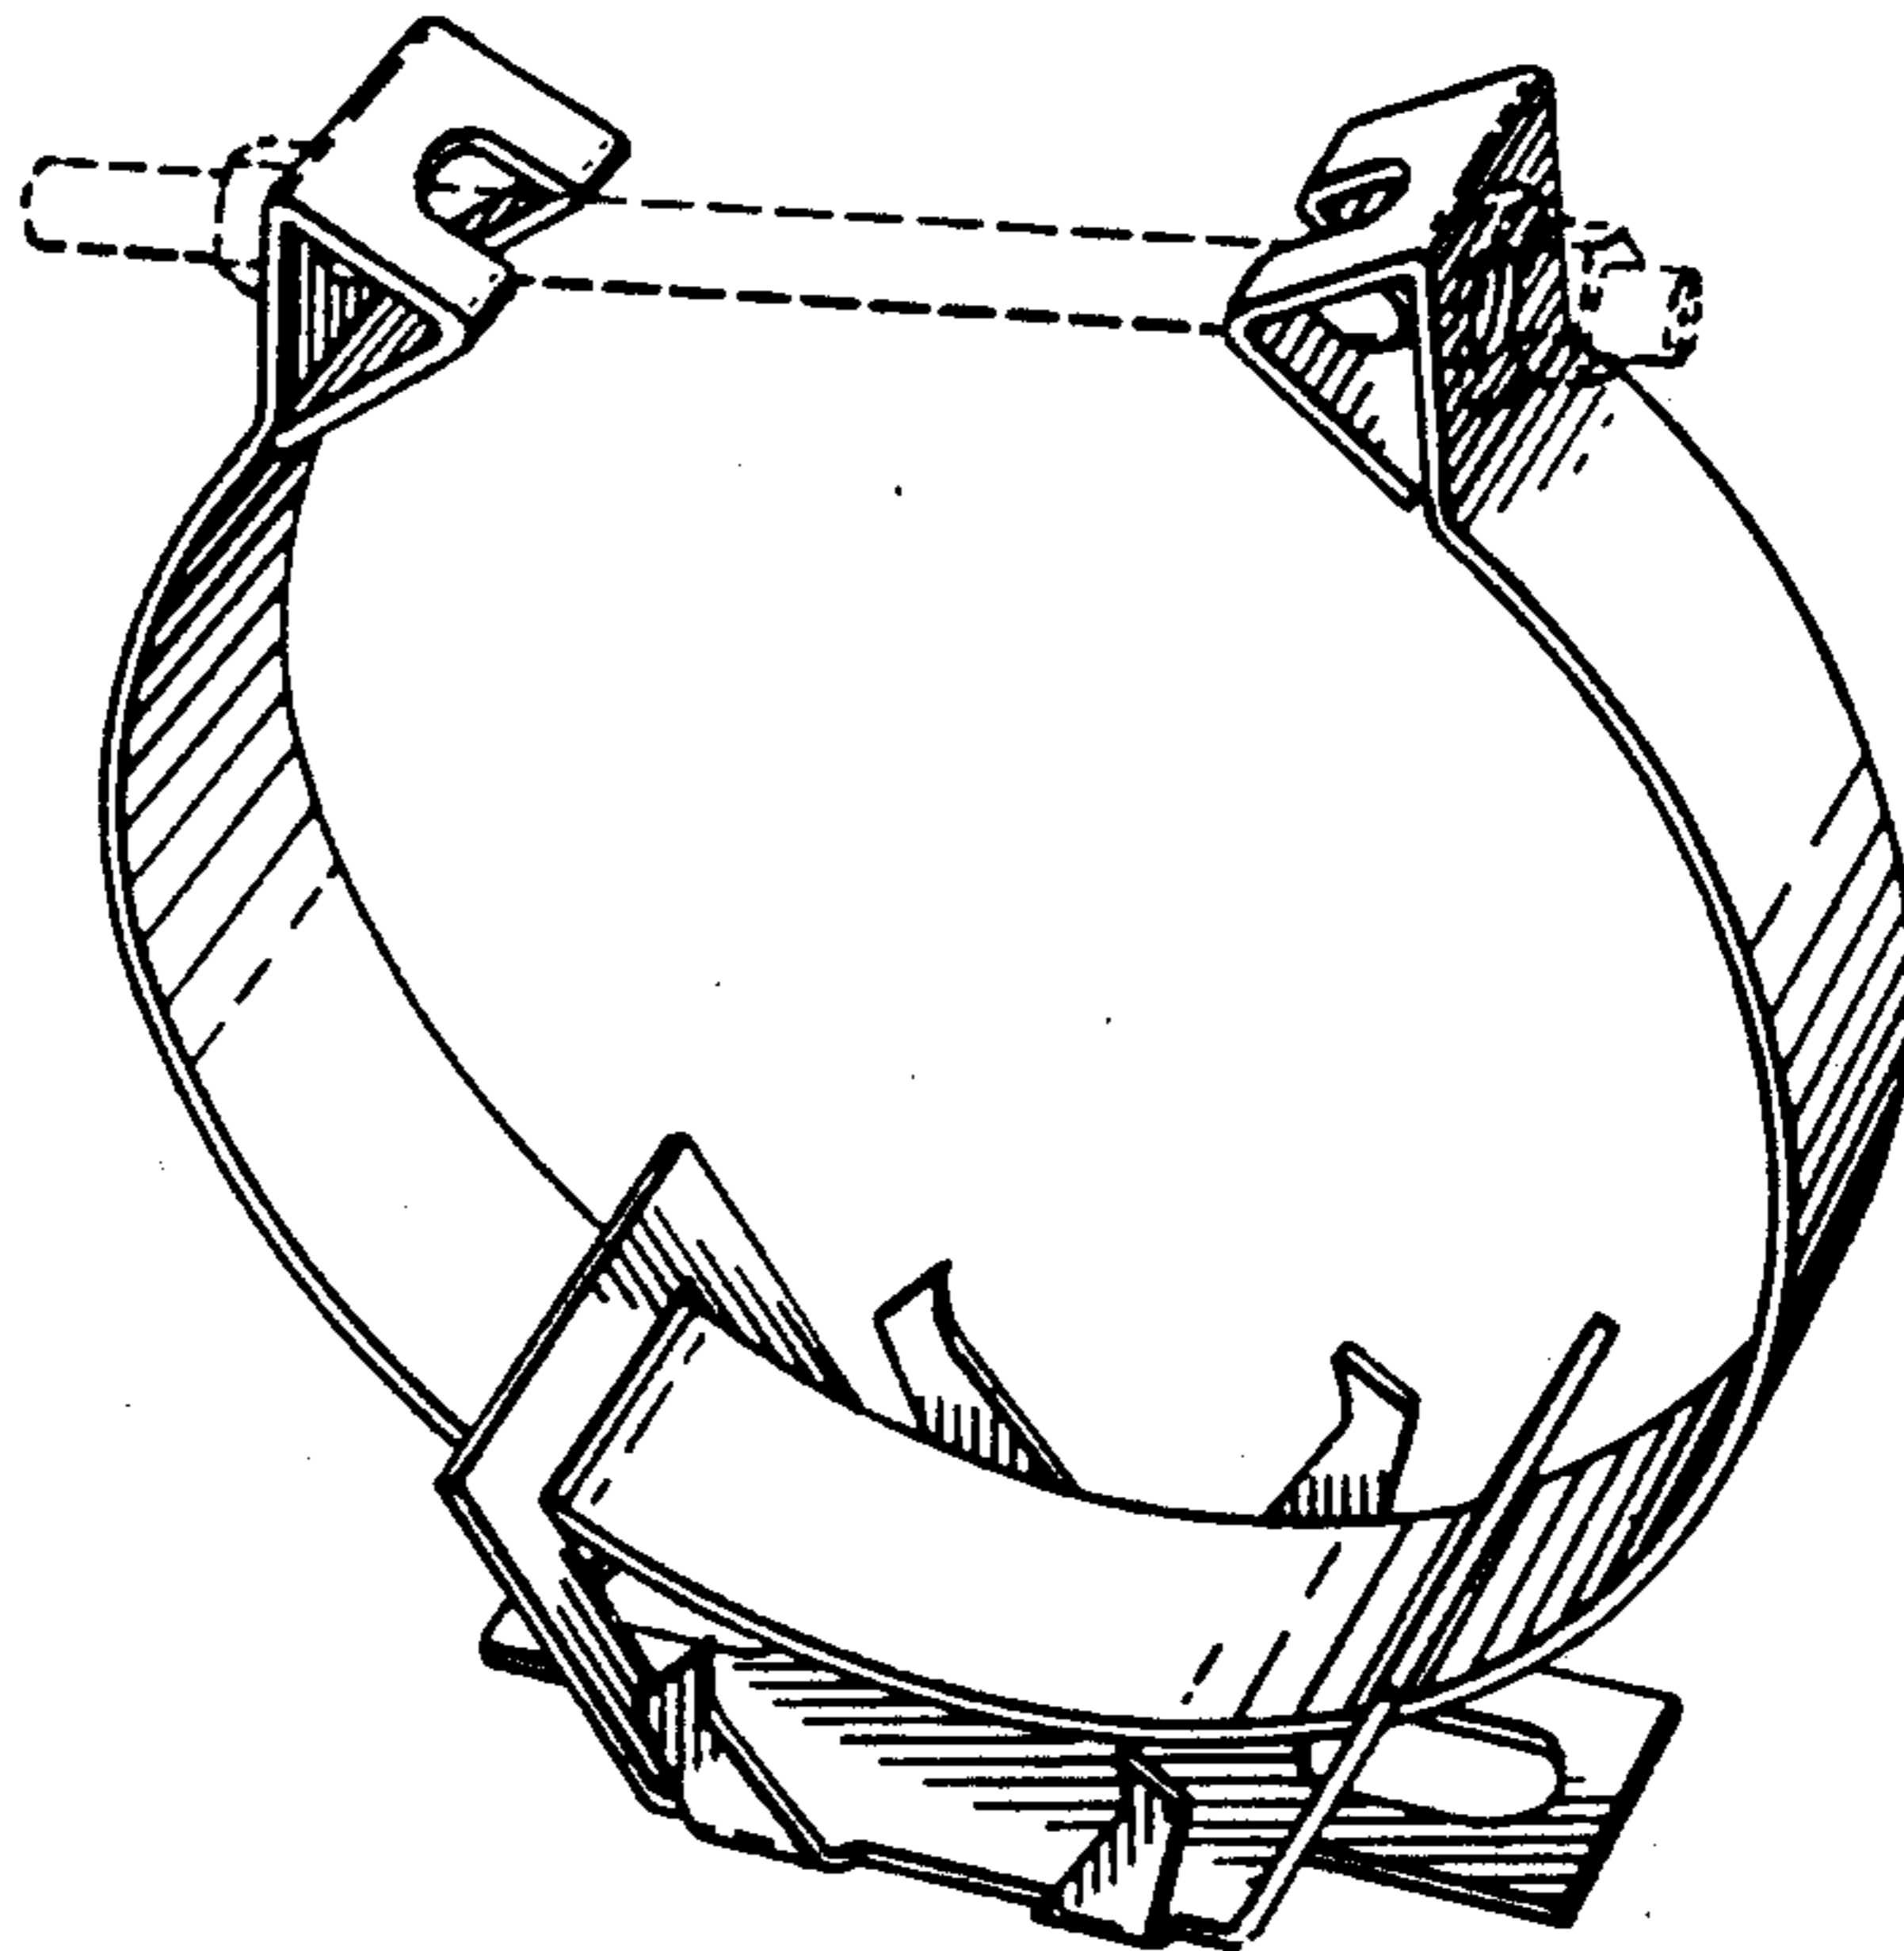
is a bottom perspective view of a support bracket for poles of circular cross-section showing my new design;
